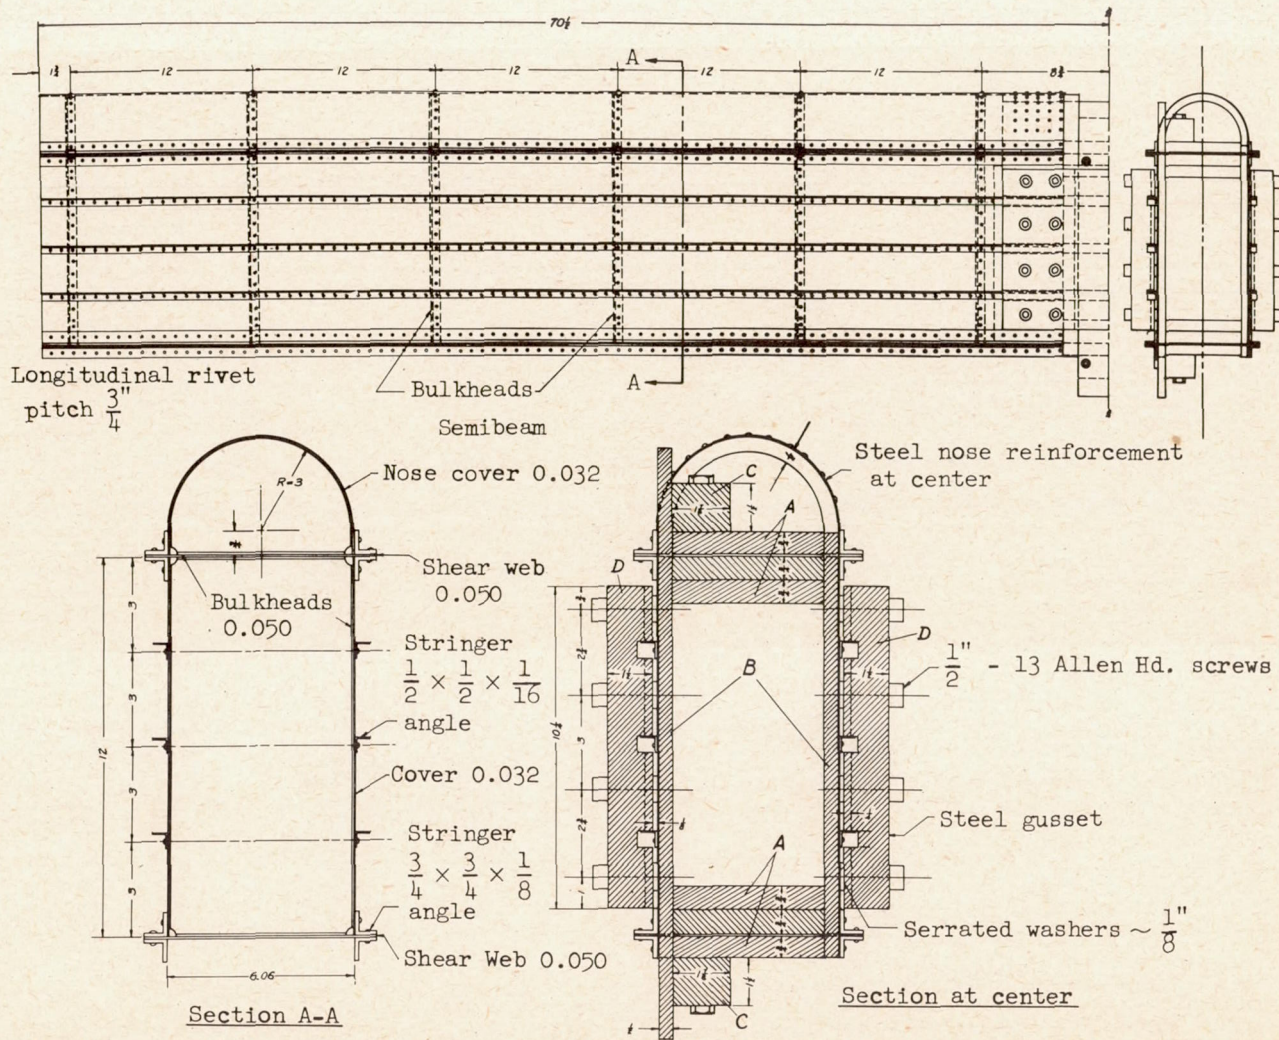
Design of specimen. All dimensions in inches. All rivets A17S-T3 brazier head.
